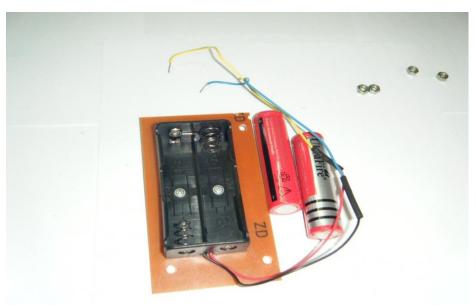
Battery Unit Plate Preparation for Control Unit Assembly
